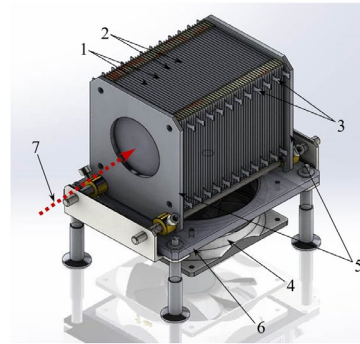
Measuring assembly, 1 - Aluminum plates; 2 - insulation between plates; 3 - leads for current measurement; 4 - fan; 5 - strengthening flanges; 6 - supporting frame; 7 - beam axis direction.
